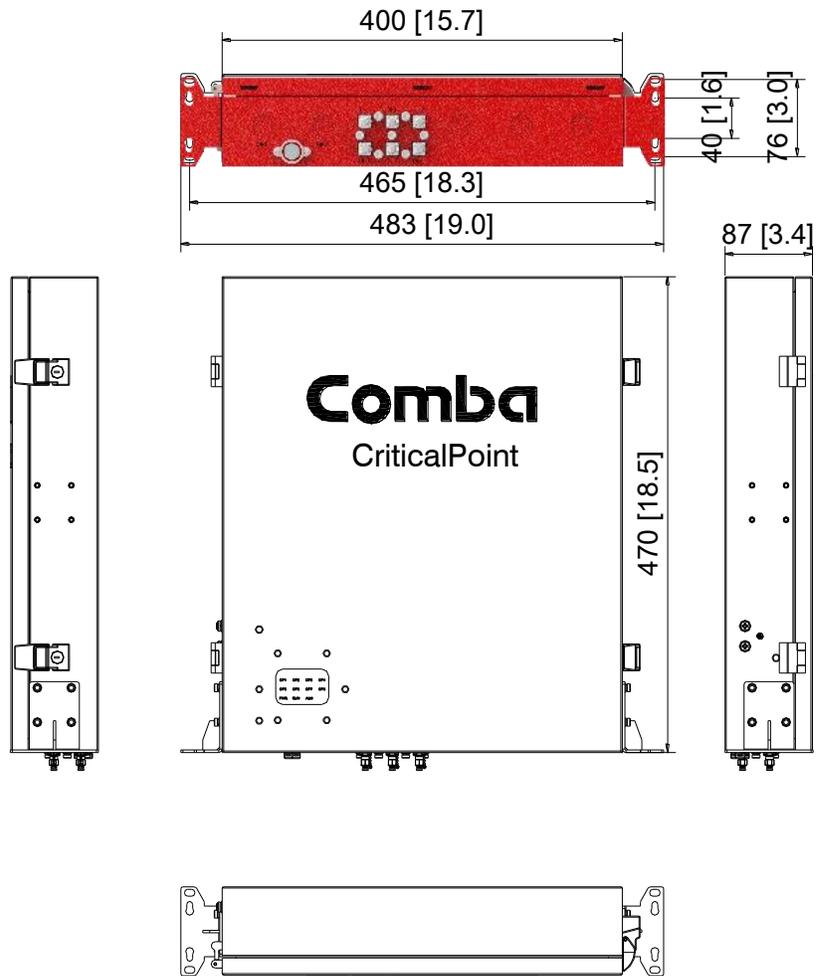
V2 FOU Cabinet Dimensions - Front, Side and Bottom View
